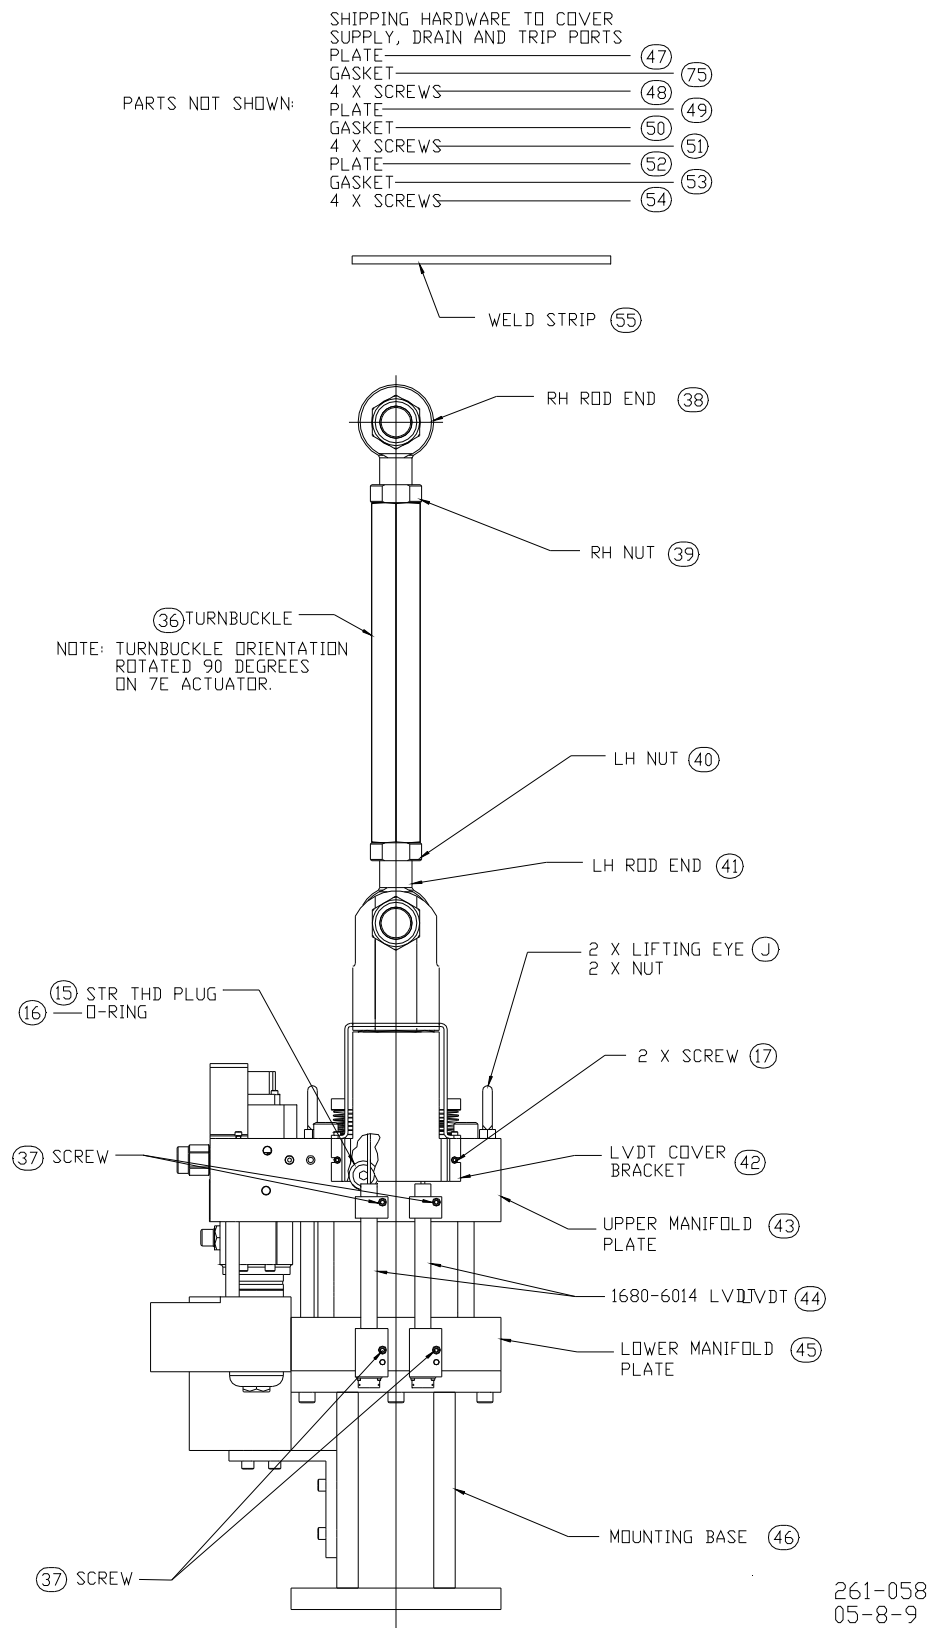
IGV Actuator with Hydraulic Trip (right side view)
